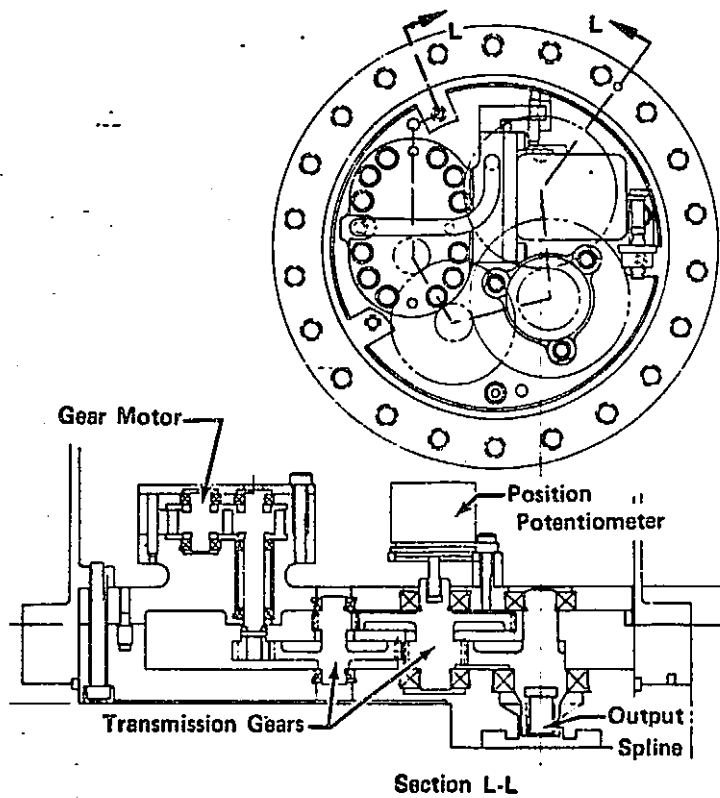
Transpiration Coolant Valve Actuator Is Powered by Hydrogen Gas Flowing in Parallel With the Valve
